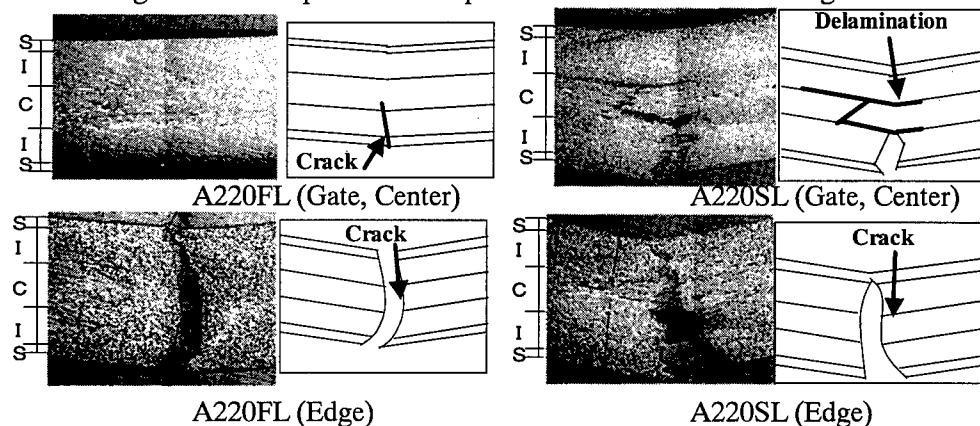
Fracture aspects of TD specimens of A220 after bending test.
